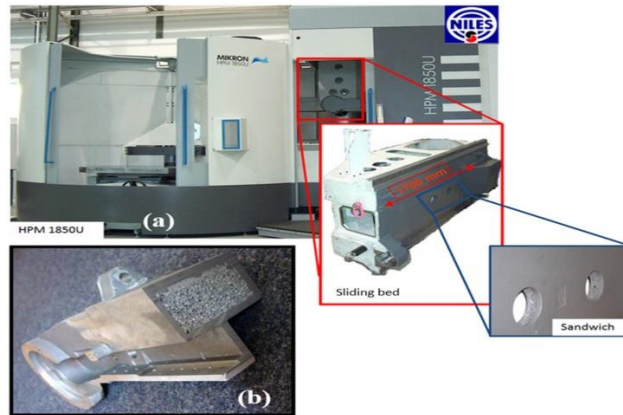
(a) Sliding bed of a milling machine made of welded aluminum foam sandwich (courtesy of Thomas Hipke, IWU, Chemnitz, Germany); and (b) a beam of a textile machine filled with Alporas foam (courtesy of the Au Metallgießerei, Sprockhövel, Germany). (79)
